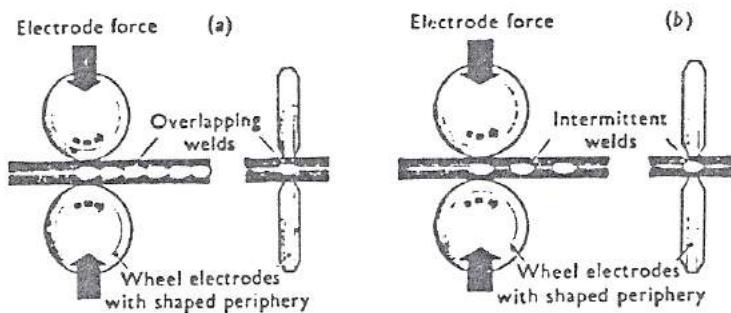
Seam welding principles (a) Overlapping spots
